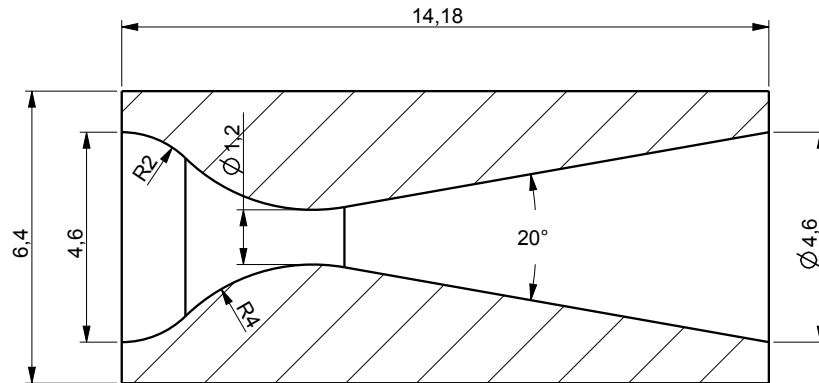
Sectional view of the mass-control nozzle with main dimensions.
